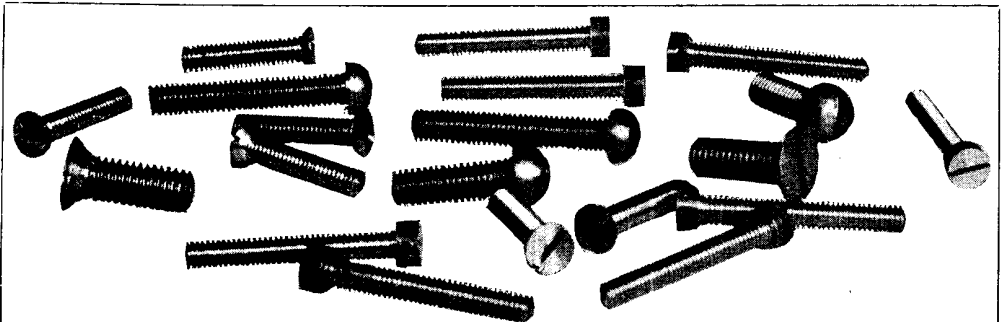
An assortment of screws frequently used in all kinds of wireless apparatus is here shown. These are known as cheese-head, round-head and countersunk screws, and are made in standard sizes
